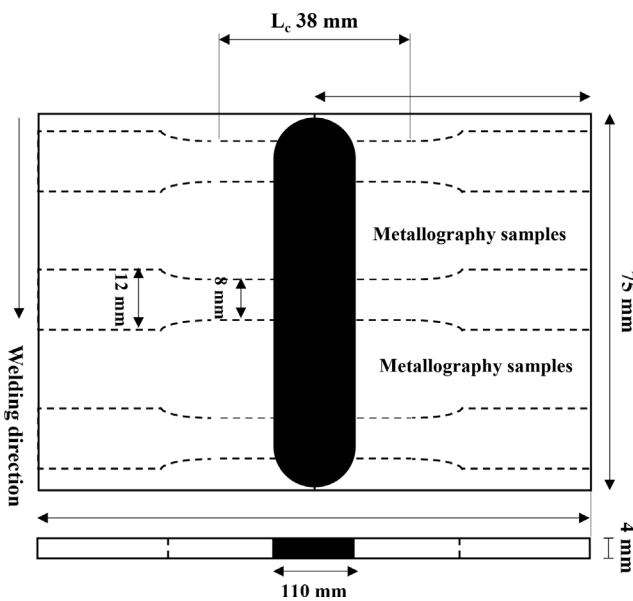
Sketch of the FSW welds, tensile, and metallographic samples
